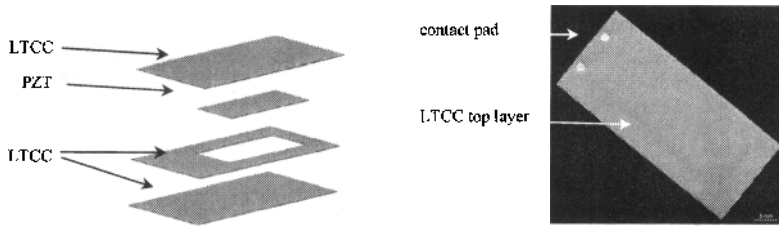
LTCC packaged piezo module<sup>23</sup>. Left: exploded view, right: prepared module
